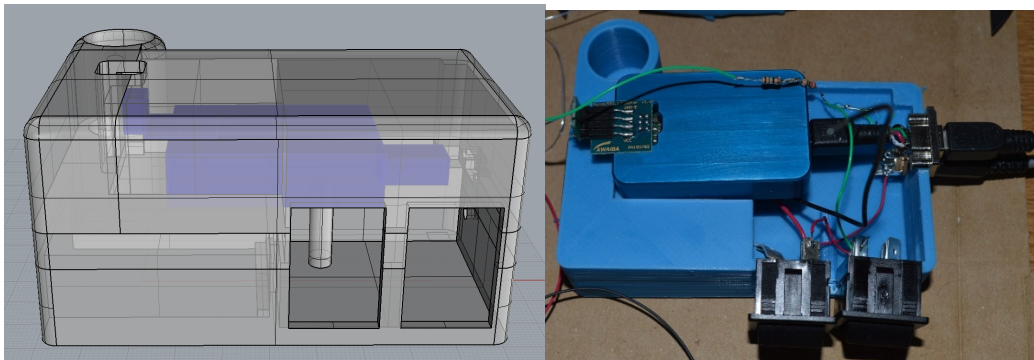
CAD rendering of the back end unit (right) and the back end unit prior to final assembly (left) with electronic components in-place.
